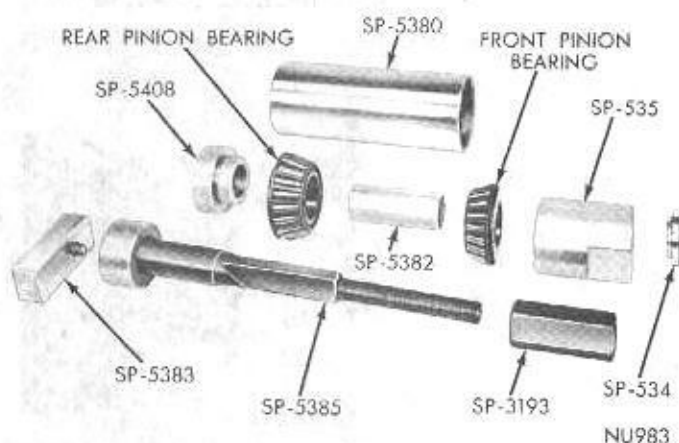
Rear Axle Setting Gauge Tool C-3715 and Adapter Set C-4084
